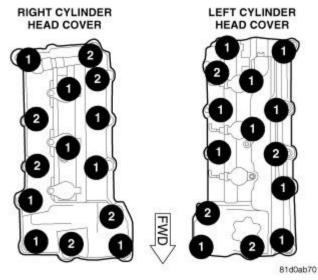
Cylinder Head Cover Fasteners Courtesy of CHRYSLER LLC
